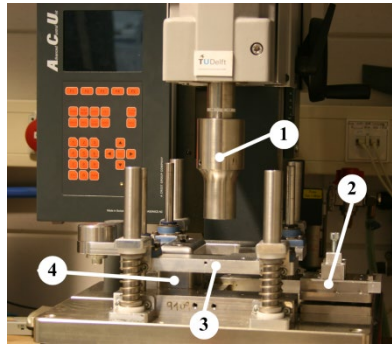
Ultrasonic welding setup: 1) sonotrode, 2) top clamp, 3) upwards-sliding frame for top clamp, 4) bottom clamp.
